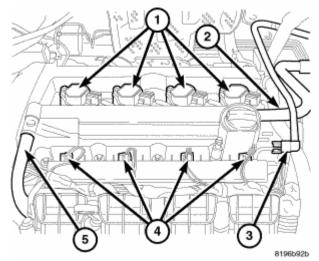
COIL CONNECTOR Courtesy of CHRYSLER LLC
